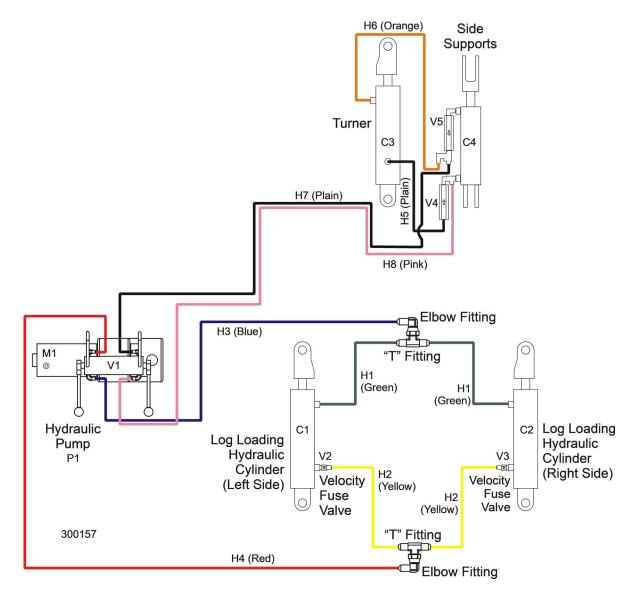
HYDRAULIC LOADER/TURNER LAYOUT DIAGRAM
